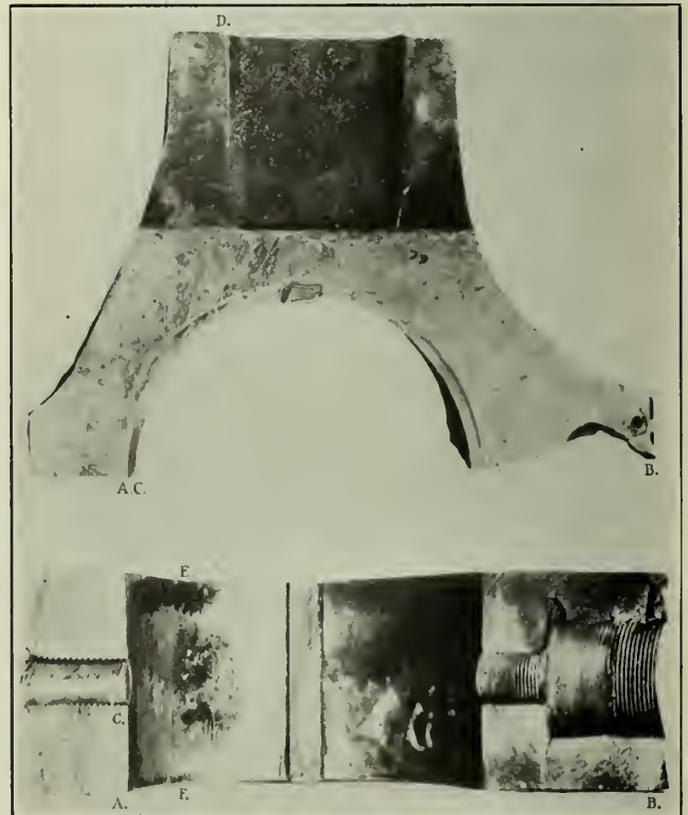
Side and End View of Broken Leading Locomotive Side Rod.
